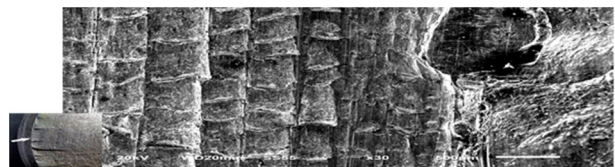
Machining traces of rough surface of axis and sub-layer fatigue glow
